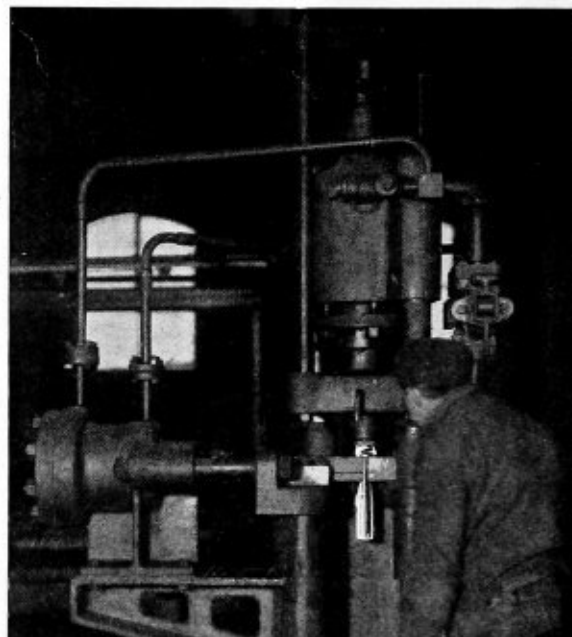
FLANGING MACHINE, SHOWING FINISHED TEST.
